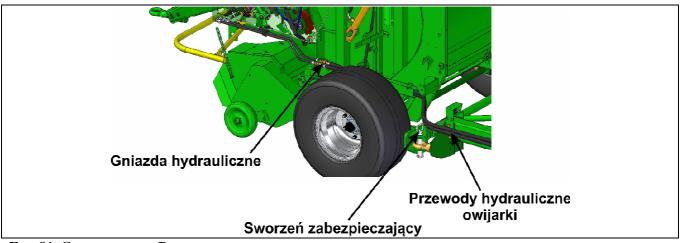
COUPLING THE BALER WITH A WRAPPING MACHINE
